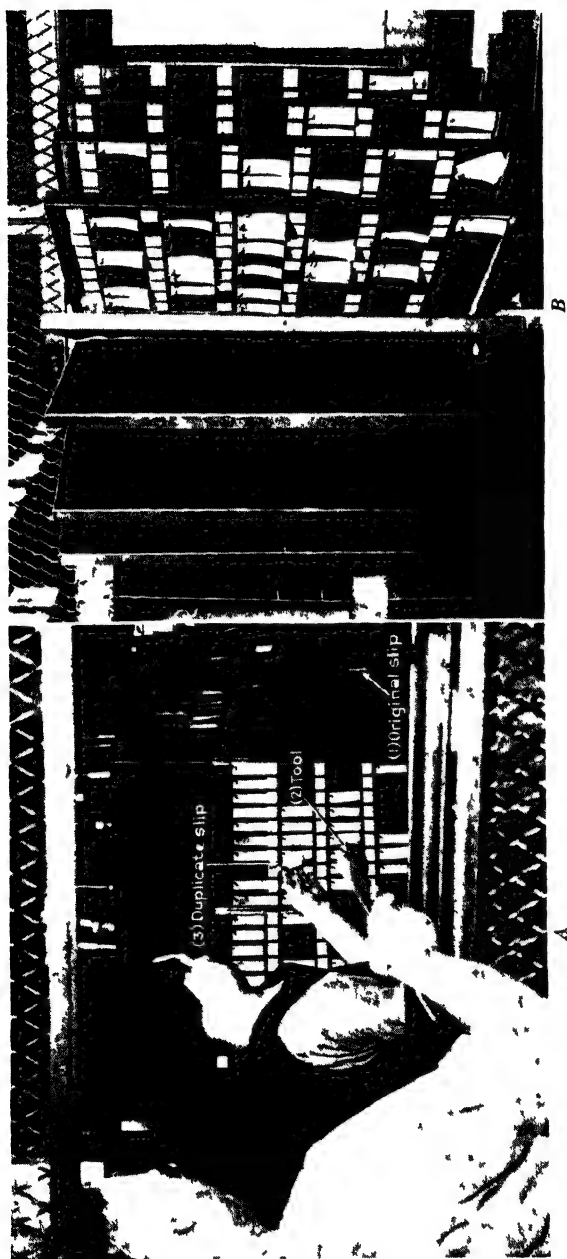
A Tool crib attendant placing duplicate tool-order slip on man's hook after placing original slip on tool hook and handing tool to workman B. Hinged name and pay-number hook racks arranged in book form in toolroom
